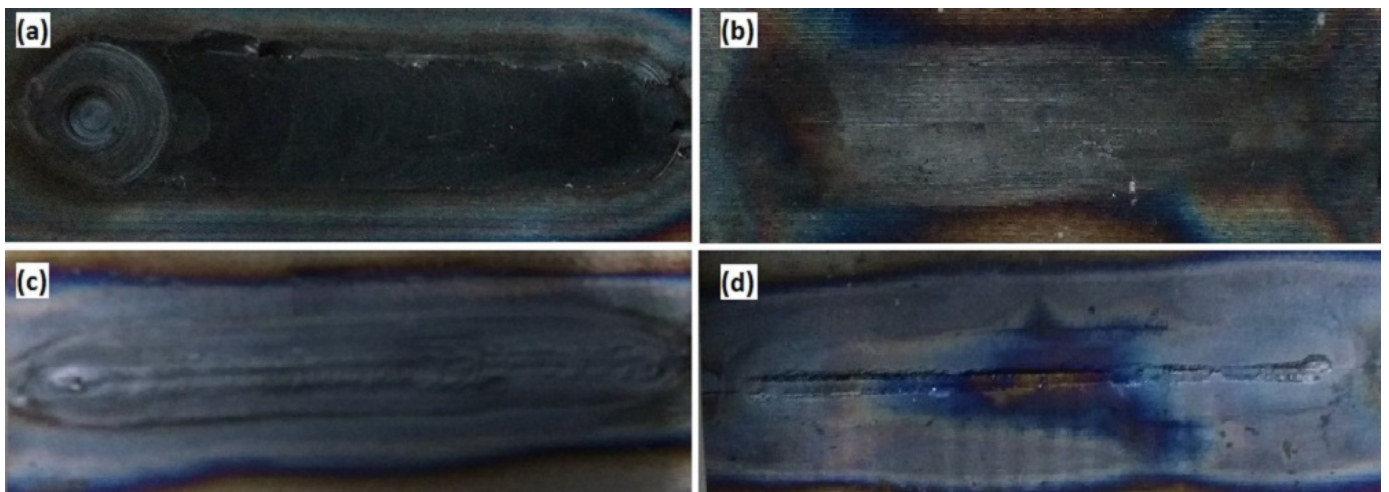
Top and root of (a) & (b) FSWed butt joint and (c) & (d) Autogenous TIG welded butt joint
